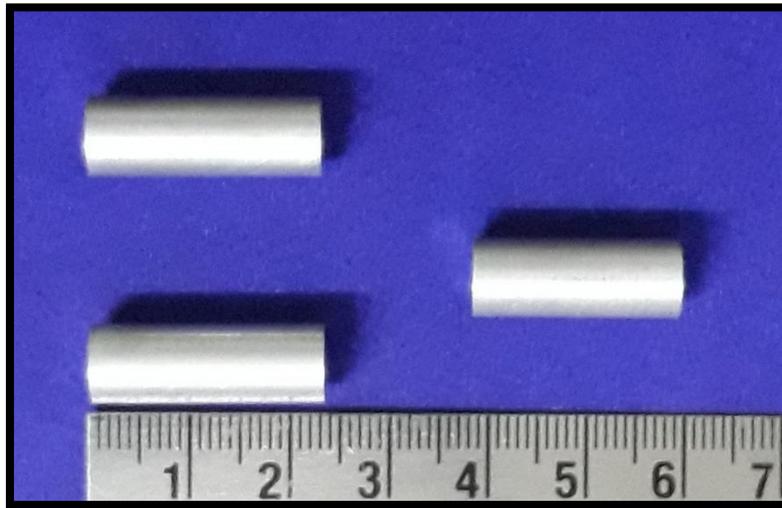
Photographic image of composite pins machined to the dimensions Ø8 mm × 22 mm
